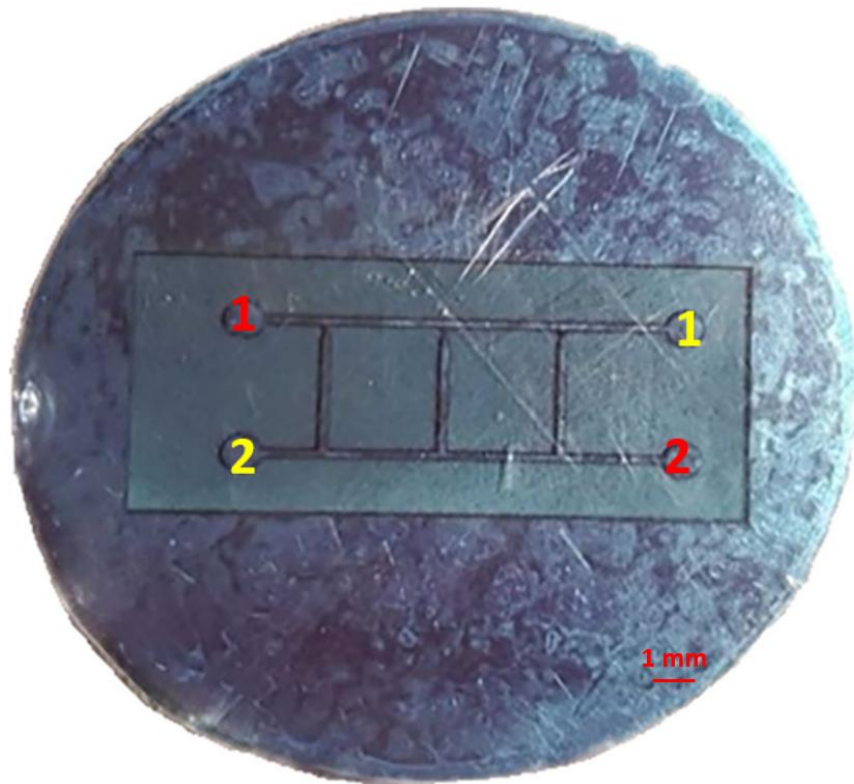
View of the stainless-steel mould manufactured from laser ablation [18].
